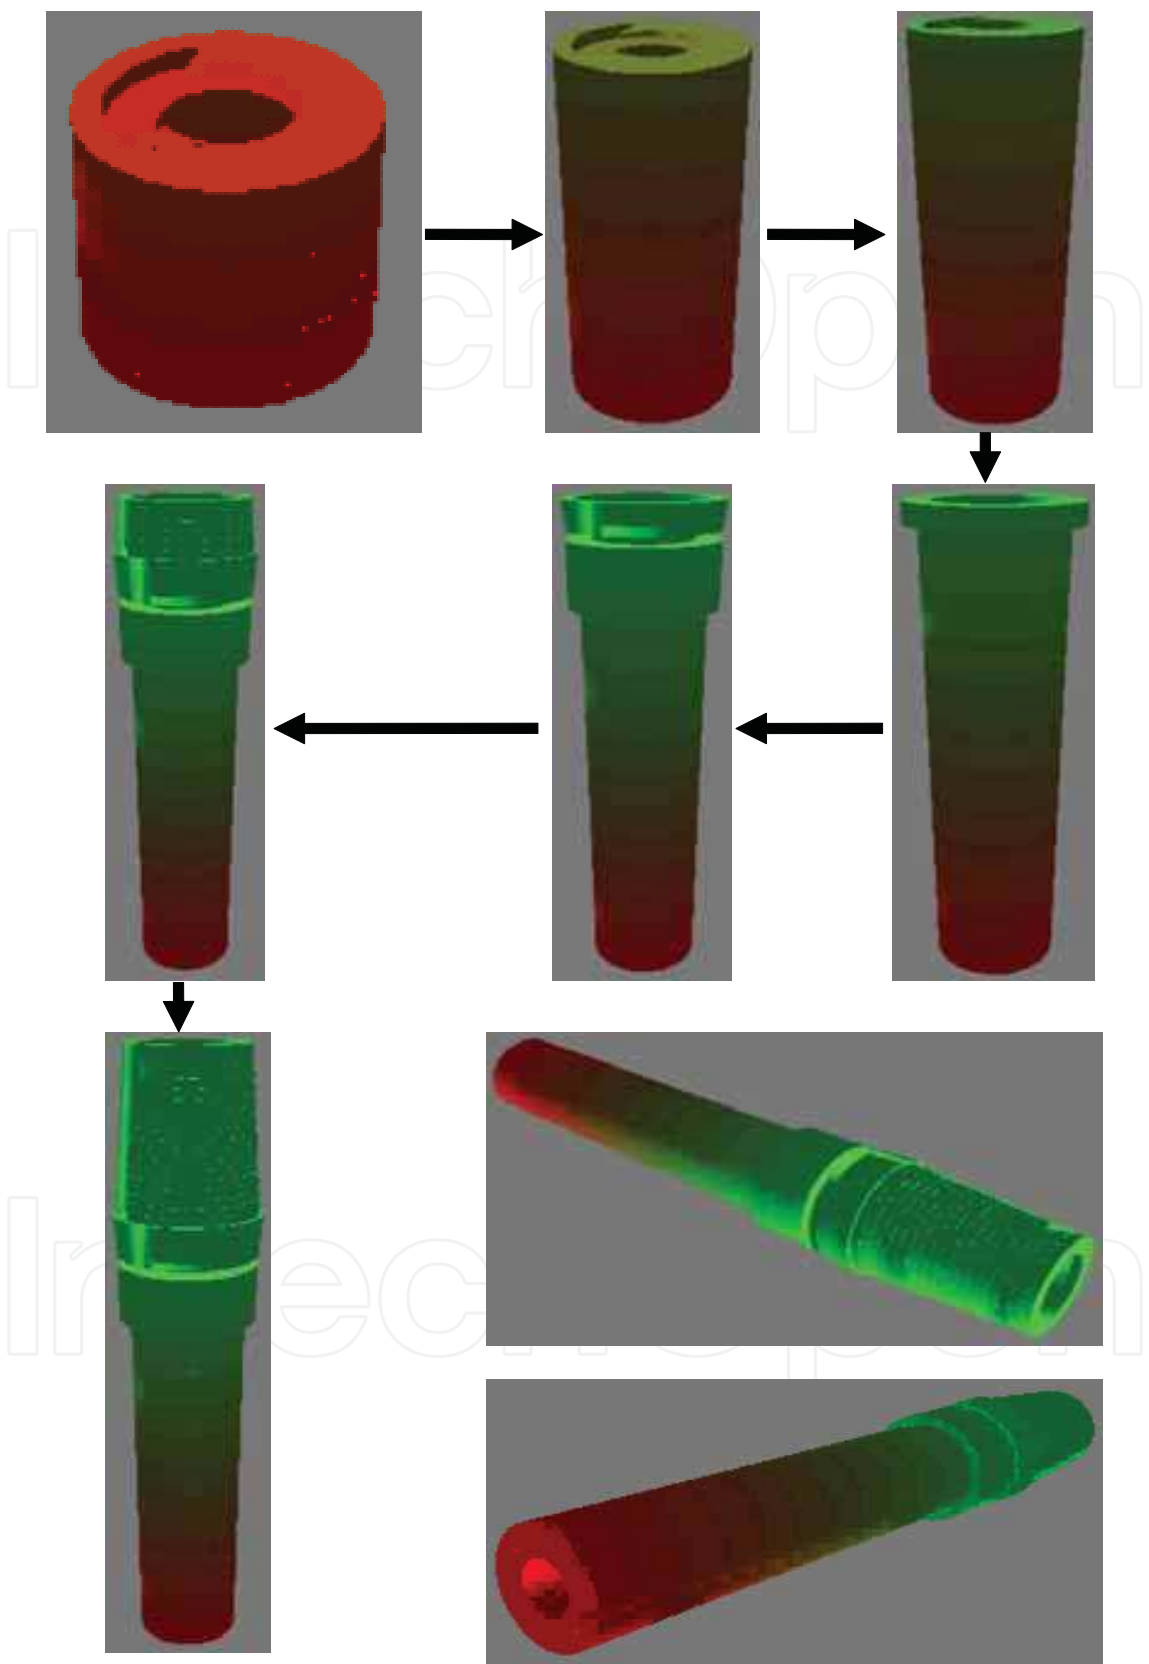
Digital fabrication of a multi-material prototype of a dental implant assembly
